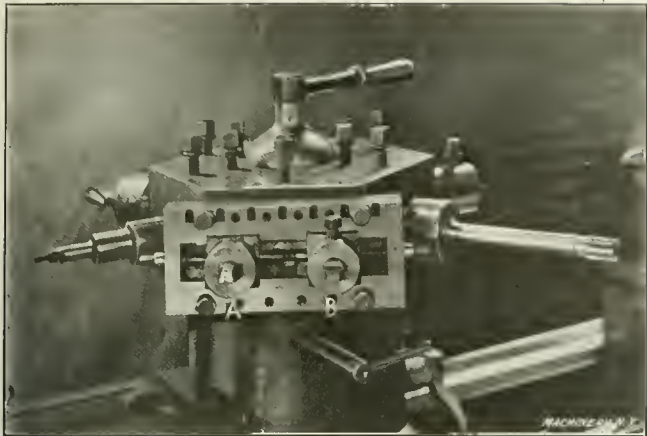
Detail View of Adjustable Tool-holder used for Cutting Circular T-slots
